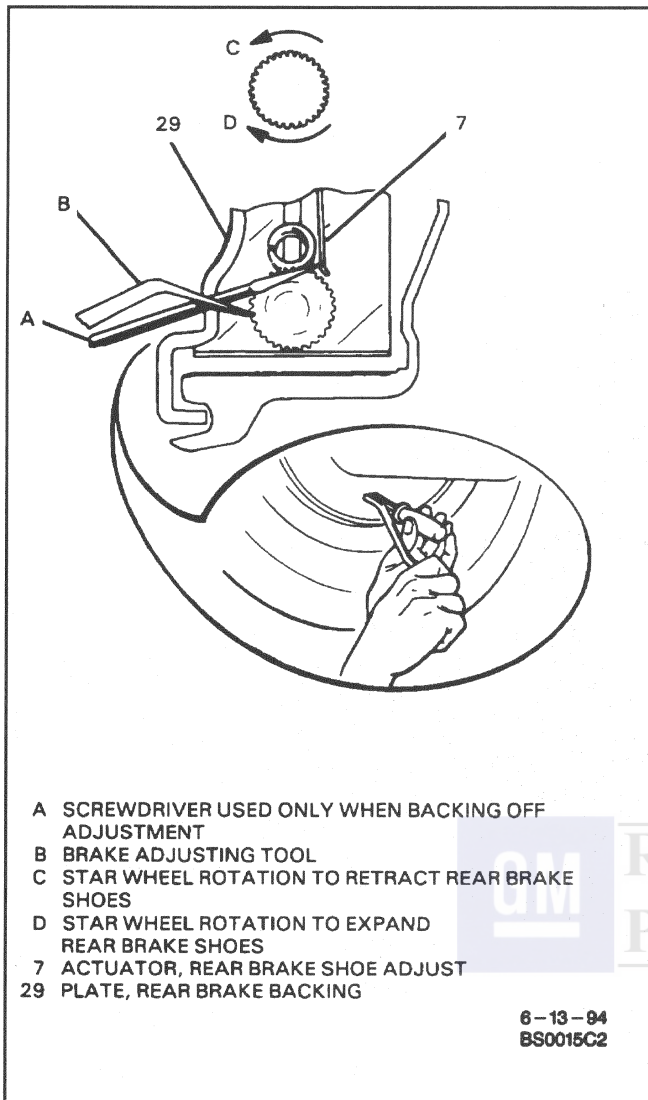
Backing Off Rear Brake Shoe Adjustment
